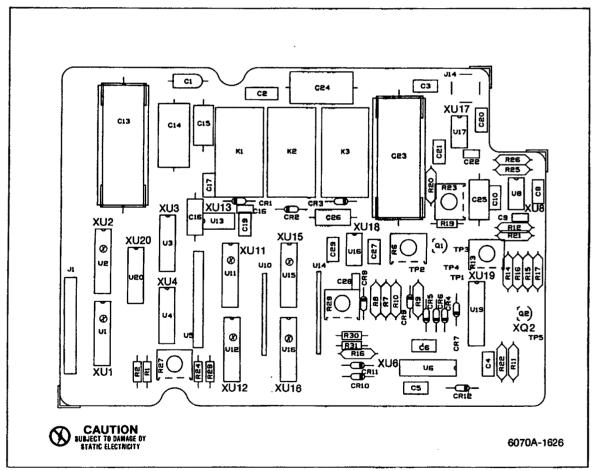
A4A2 Modulation Oscillator PCB Assembly
